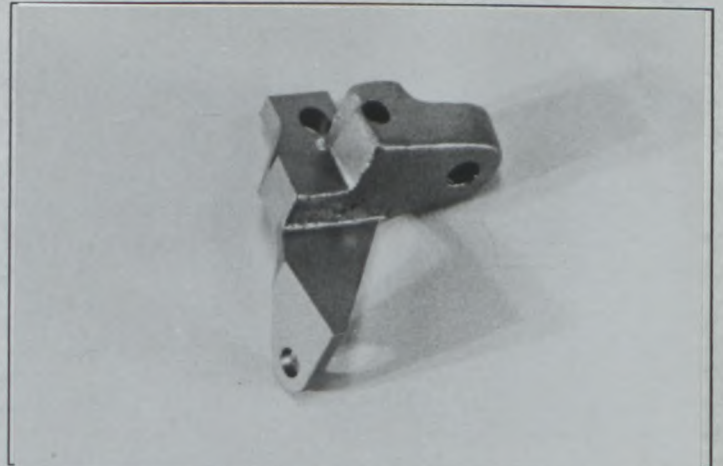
Heavy duty steering knuckle arm TYPE C
